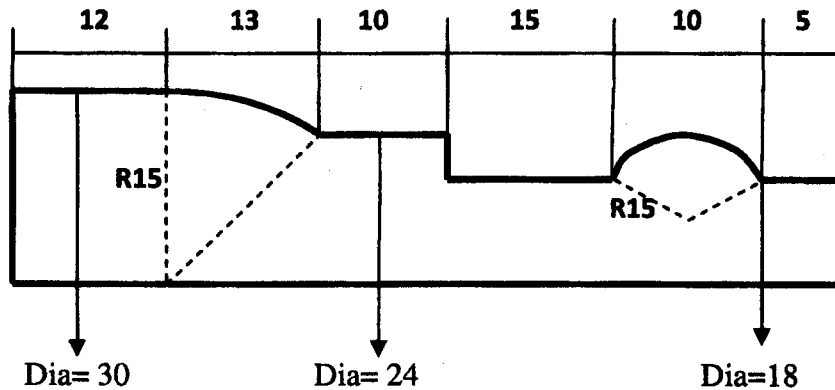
Fig.A : Half section of a CNC Lathe product (dimensions are in mm).
